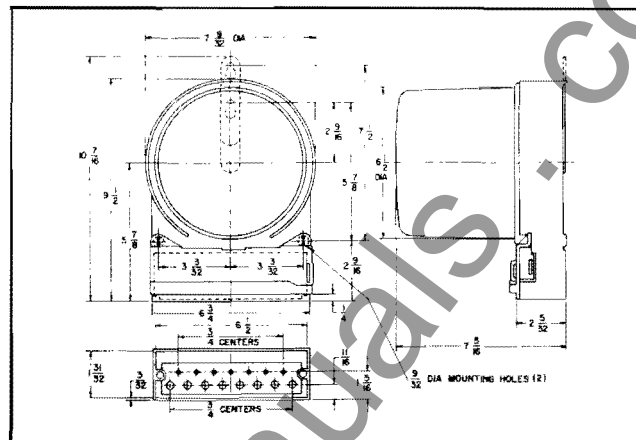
Type D2A-2, 7, & 8 Meter Outline Dimensions
